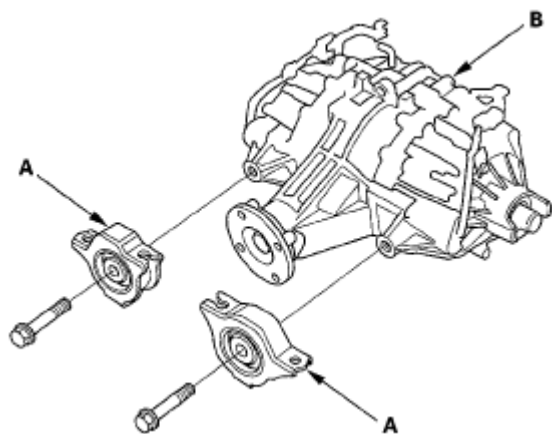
Identifying Rear Differential Front Mounting Brackets And Rear Differential
